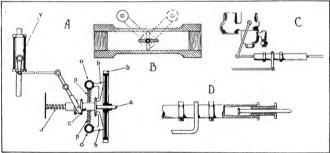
Suggestion for installing a Governor: A. Method of incorporating Valve in Intake Piper B. Construction of Butterfly Valves C. Connections to Carbaretor: D. Adjustable Rod Device.
